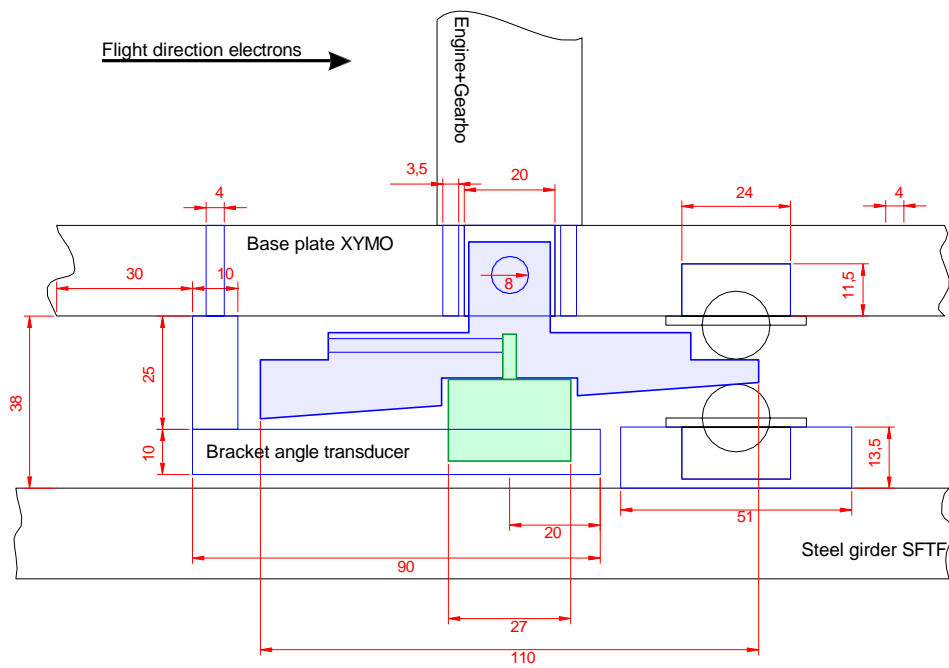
View of the lifting mechanism from the side, dimensions in millimetres, at Parts to be manufactured and bores are marked in blue, eccentric and rotary potentiometer are filled in.
